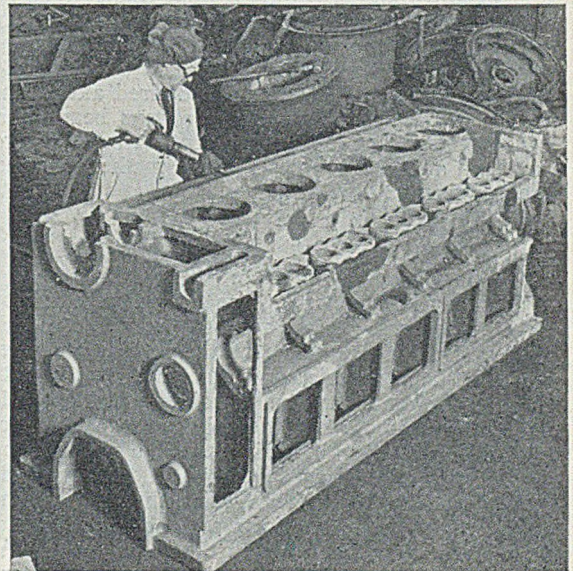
Final Dressing of a Diesel-engine Frame Casting—in this case, a Five-cylinder Unit.
